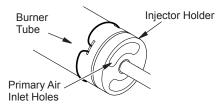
Injector Holder On Outlet Burner Tube - Rear Burner
